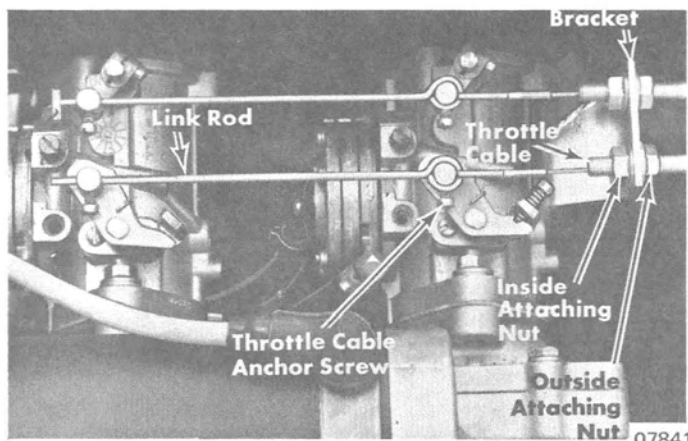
Carburetor - Mark II (Chassis Serial No. 3591478 and Below)
